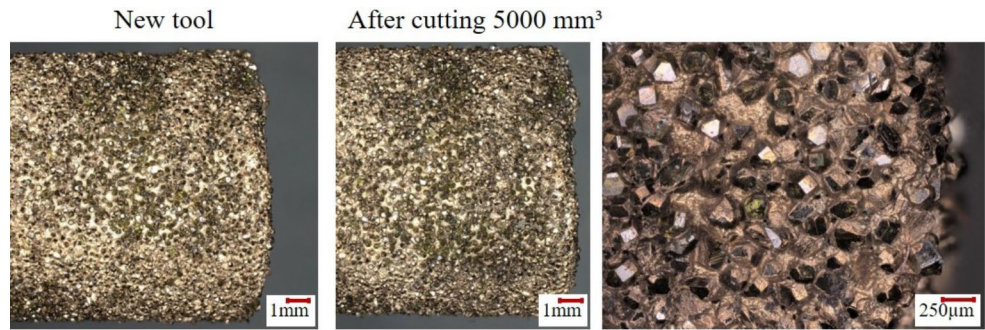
Diamond grain of a new tool (a) and diamond grain of a tool after grinding tests (b)
